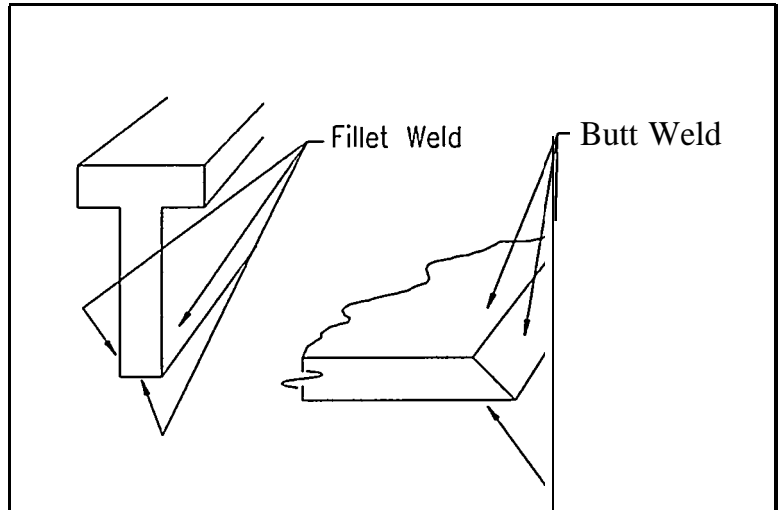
Surfaces requiring pre-weld cleaning
